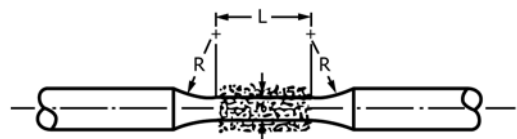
Bending Fatigue Specimen With Tangentially Blending Fillets Between the Test Section and the Ends for Rotating Beam or Axial Loading
